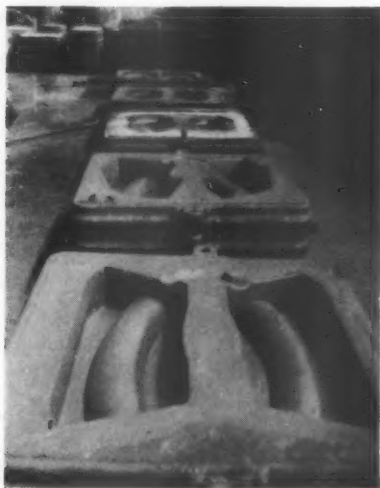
SOME DRAG SECTIONS OF THE DIE MOLDS.
